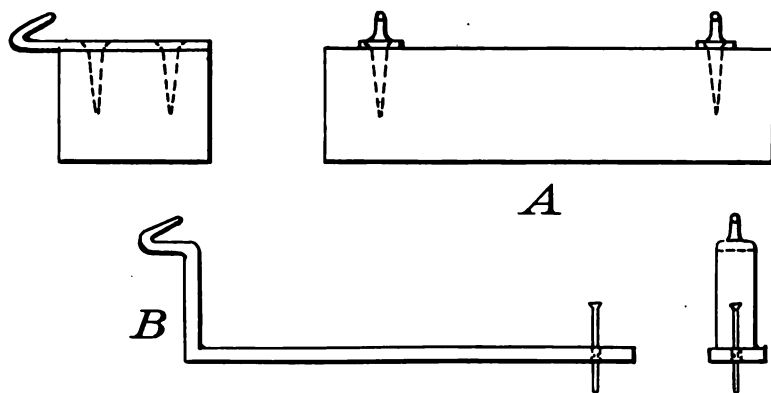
Floor Hooks Used in Laying Out Tower Tiles.
